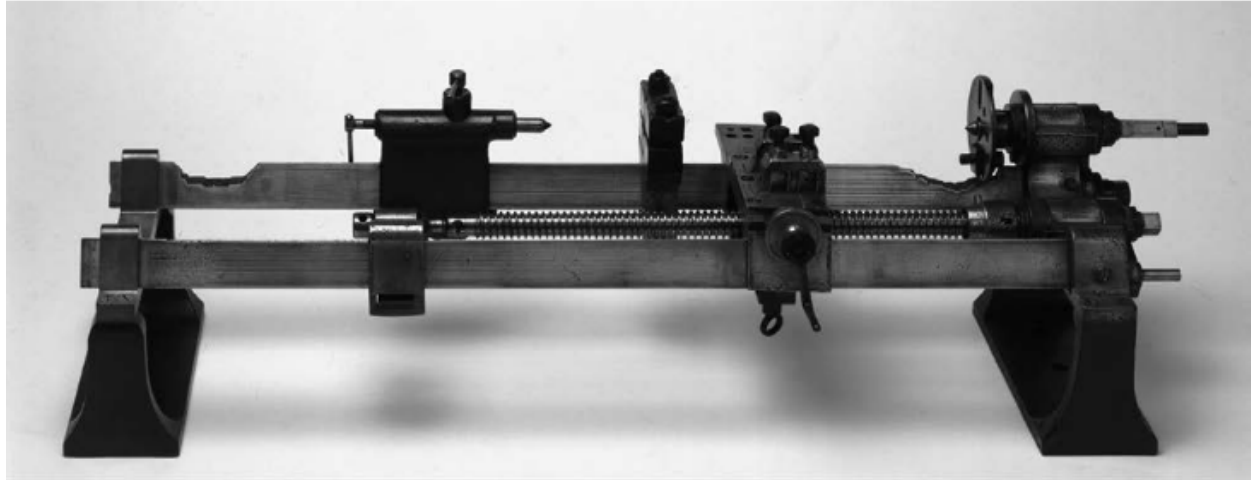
Henry Maudslay’s first screw-cutting lathe of 1797 [22,25]
